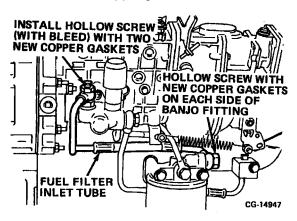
Install Fuel Inlet Tube (Fuel Filter to Supply Pump)
